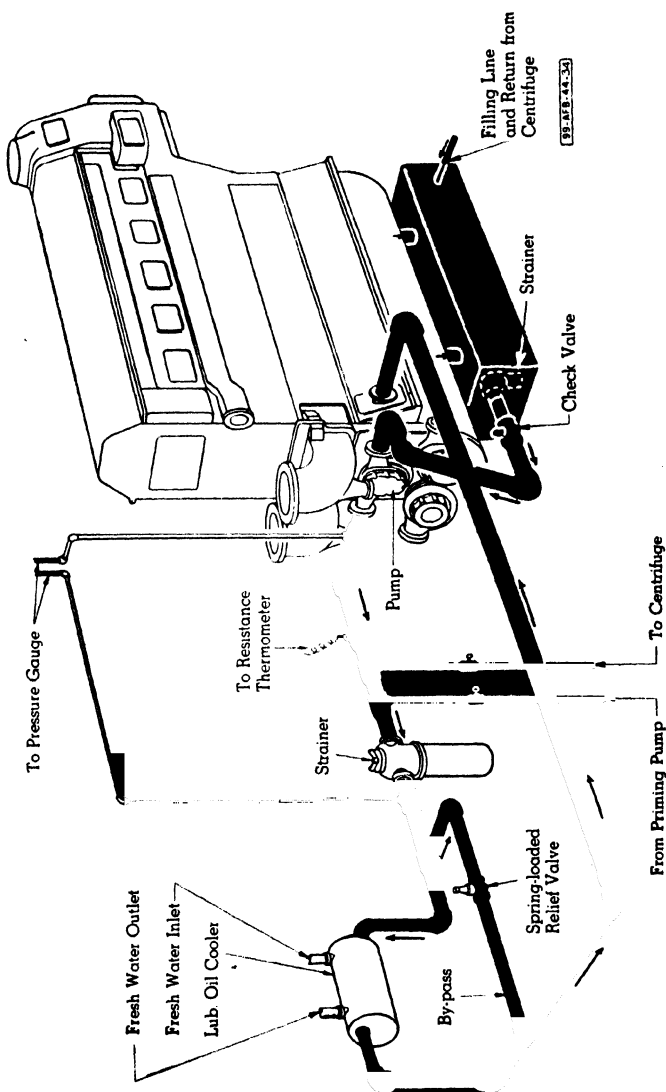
Lubricating oil system outside the engine—Fairbanks Morse opposed-piston engine, showing piping and filters. This engine is equipped with a pressure lubrication and piston cooling system which supplies a continuous flow of oil to all surfaces requiring lubrication, and to the pistons for cooling. After engine lubrication and piston cooling, the excess oil drains to the oil pan and thence to the sump tank below the engine. The pressure system consists of a positive pressure gear pump and two oil headers built into the cylinder block, an oil sump tank, a strainer, coolers, thermometers, and the necessary piping and fittings, all of which may vary depending upon the application. The lubricating oil pump is mounted on the pump mounting plate on the control end of the engine, and is driven, through gears and a flexible coupling, by the lower crankshaft. The pump draws oil from the sump below the engine and forces it successively through the strainer and the coolers. In the coolers, the oil passes through tubes mounted in a core. Fresh water flows through the core cooling the oil. Leaving the cooler, the oil is piped to the engine, where it enters the lower lubricating oil header through an inlet flange. A spring-loaded relief valve is installed across one of the coolers to open at 15 lb pressure to insure circulation if the oil is congealed in the cooler when starting. In the line between the pump and the strainer is the bulb of an electrical resistance thermometer, the indicator for which is on the instrument board. From the same line, between the strainer and the coolers, a small pipe leads to a duplex pressure gauge on the instrument board.
